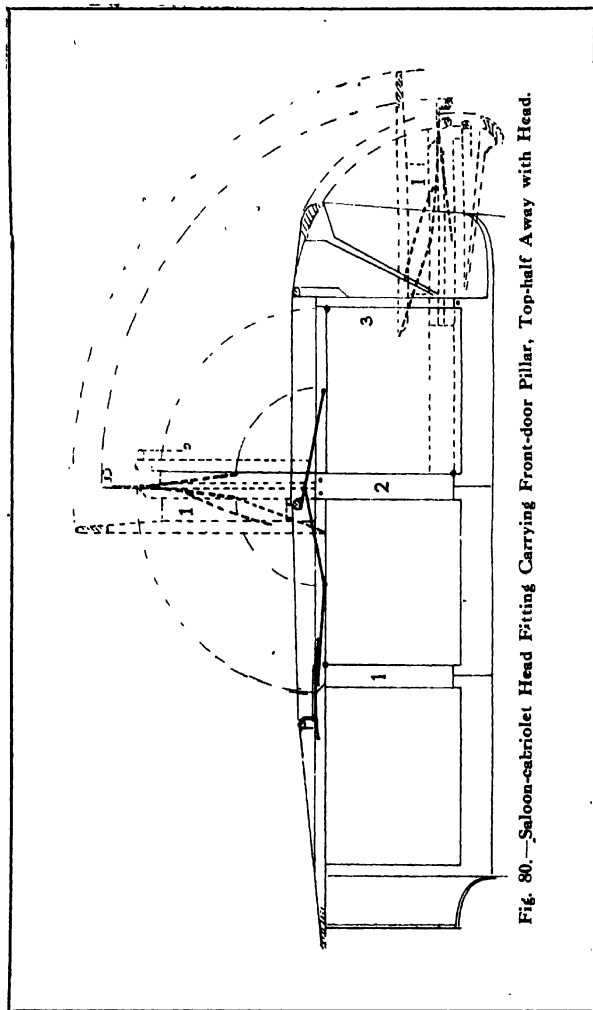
Saloon-cabriolet Head Fitting Carrying Front-door Pillar, Top-half Away with Head.
